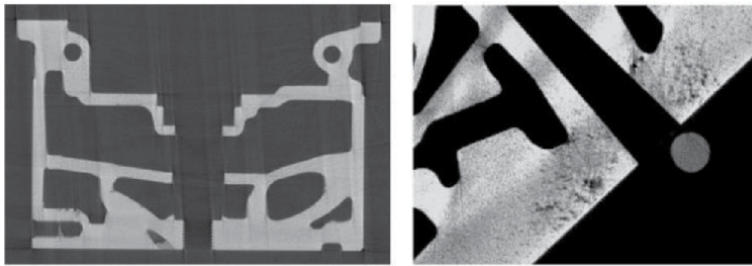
Examples of an XCT slice of an aluminium sand cast engine cylinder head and of porosities [37].
